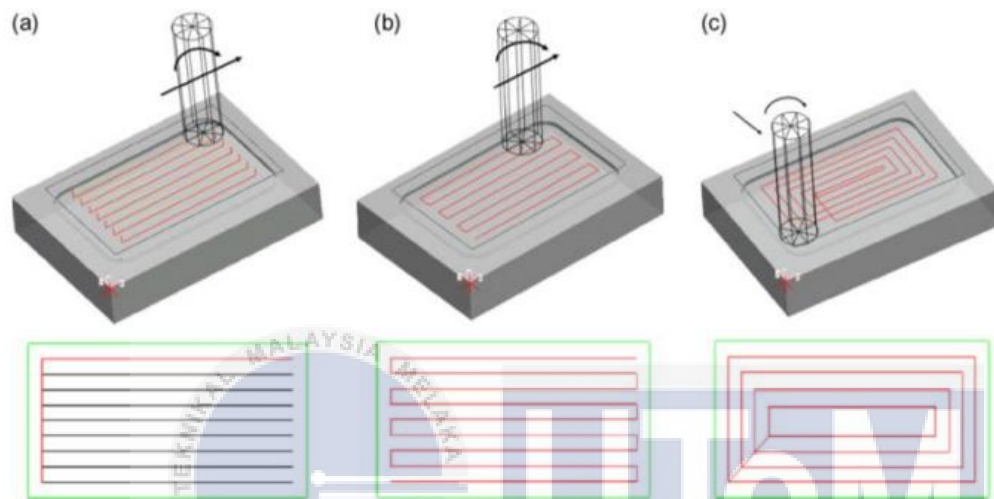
Cutter path strategies in pocket milling: (a) One direction; (b) Back and forth; and (c) Spiral. (Muhammad Munzir bin Razak 2016).
